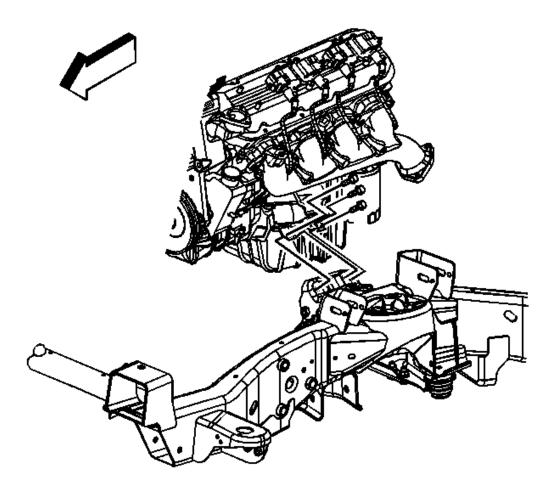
View Of Engine Mount-To-Engine Mount Bracket Courtesy of GENERAL MOTORS CORP.
